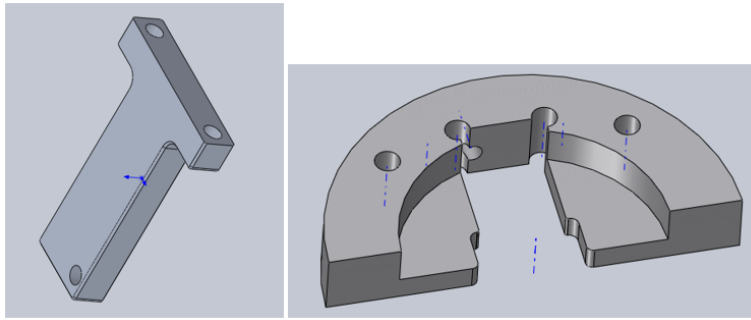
Left: Custom bracket Right: Re-designed half of piston guide
